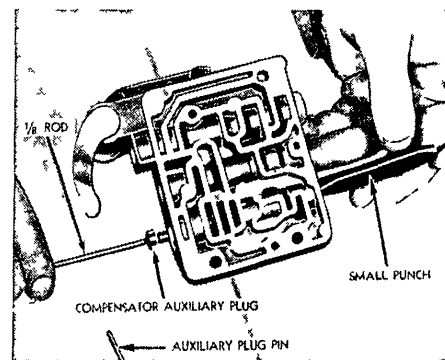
Insert 1/8" rod in hole in compensator auxiliary plug and use a small punch to push plug from body. Caution—Be careful not to allow plug to drop from rod and become lodged in valve body
